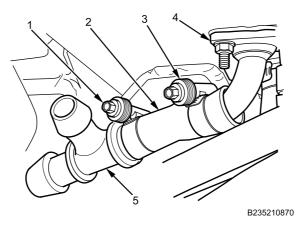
Fuel-Fired Heater Inlet Hose at Penetration Dust Plate.
